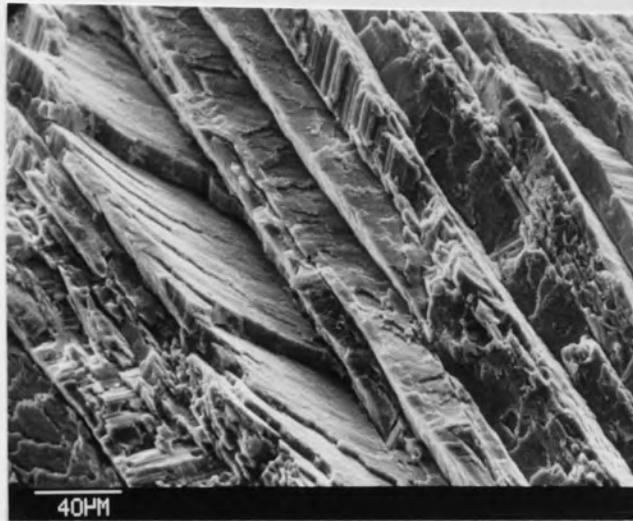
Transgranular failure on fast fracture surfaces of 8090-T6 fatigue specimens.
